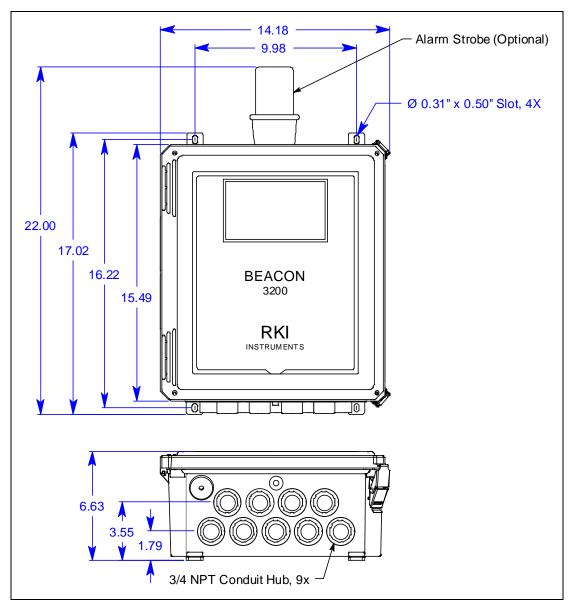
Outline and Mounting Dimensions with 51-0170 Series Alarm Strobe Installed
